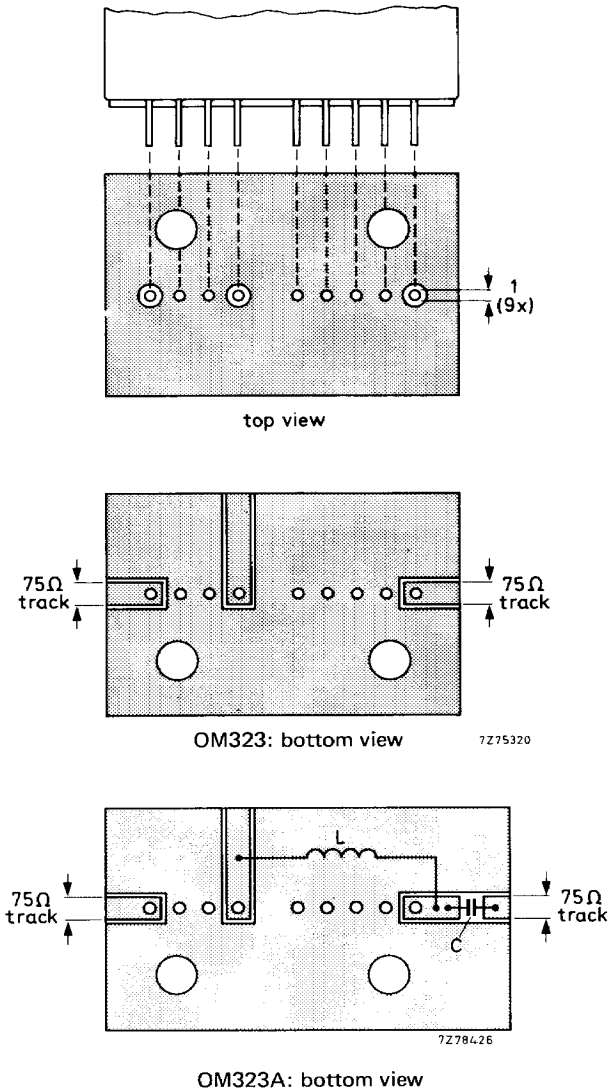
Printed-circuit board holes and tracks for the OM323 and OM323A.
